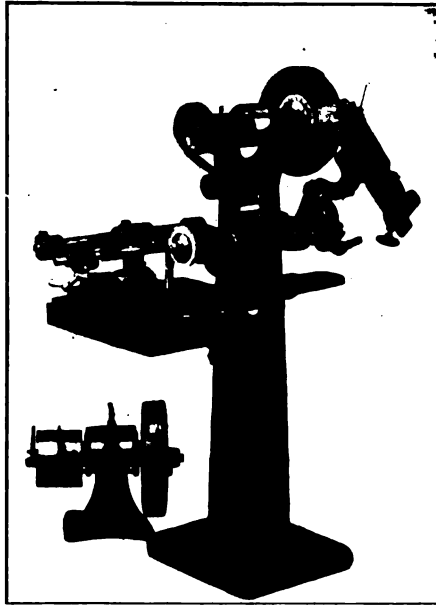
Wilmarth & Mormon Company yankee drill grinder, with attachment for universal grinding. Very desirable in a small shop with a considerable range of tool grinding work.
